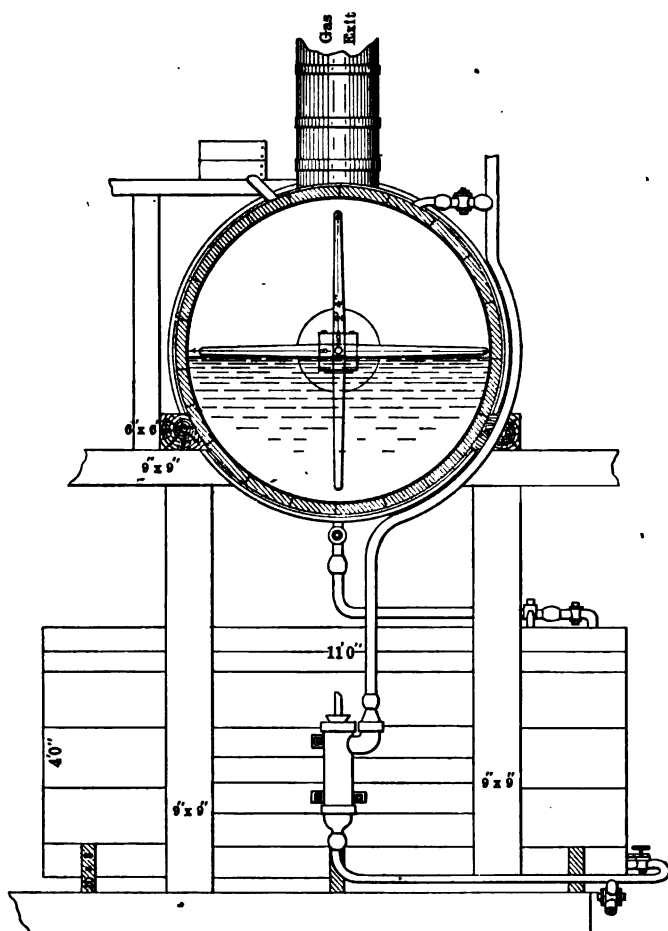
The end elevation and section of a horizontal washer and tanks (1865).
